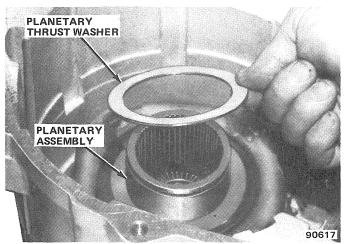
D-22 Planetary Thrust Washer and Planetary Assembly
